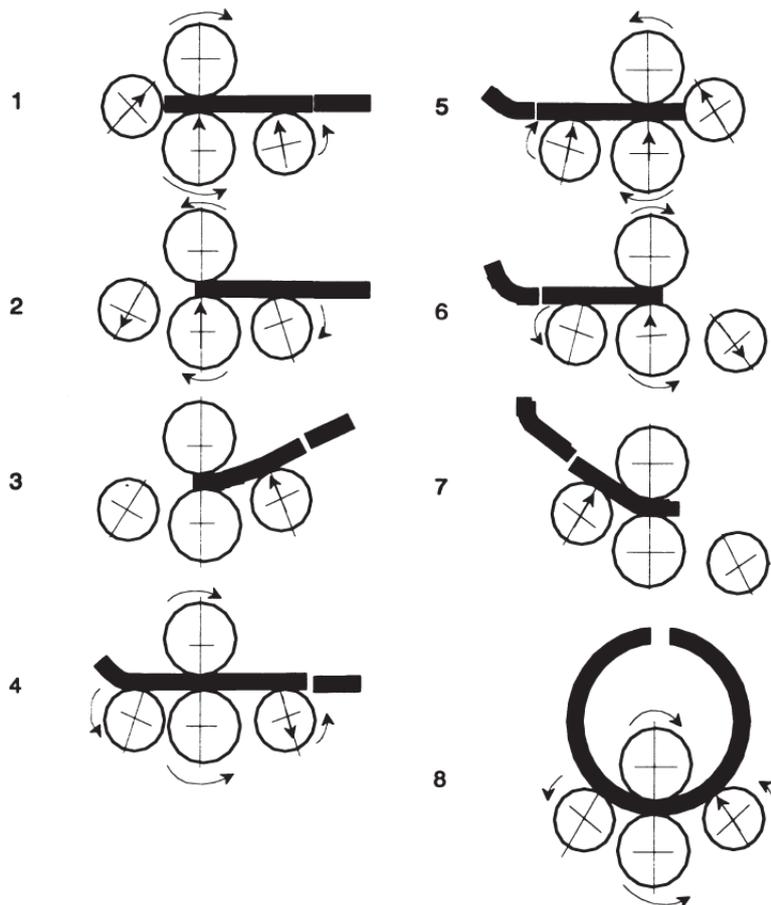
Operational sequence for thick plate bending process with a 4-roll plate bending machine [10].
